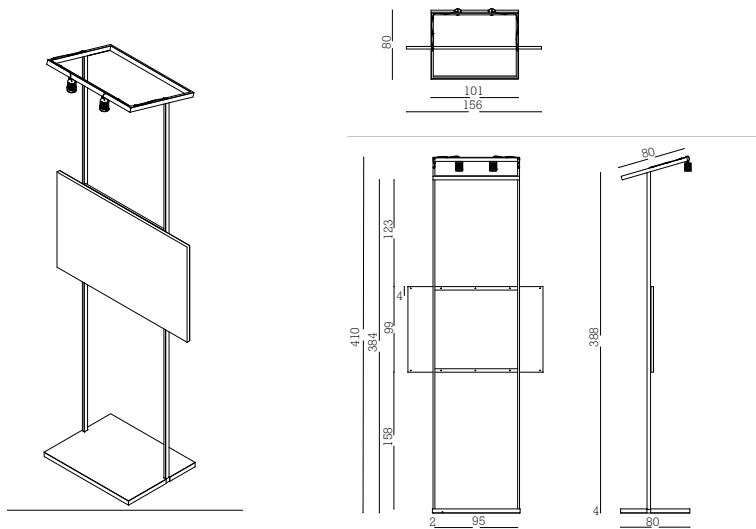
Construction detail - Structure of an exhibition element | Axonometric view and dimensioned projections.
